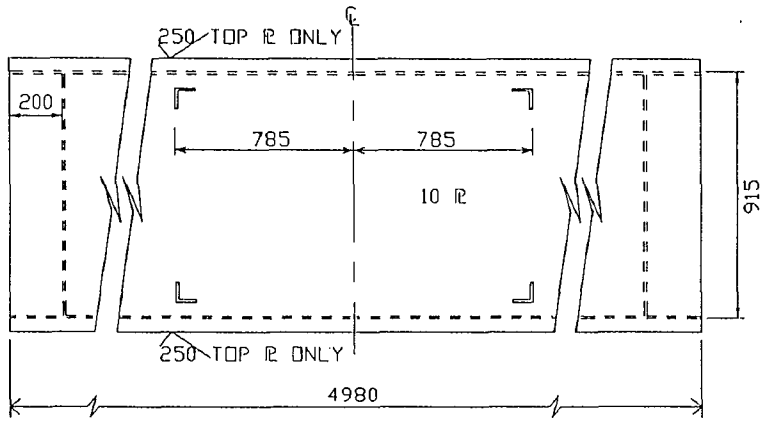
Primary Detail Biaxial Specimen detail drawing
